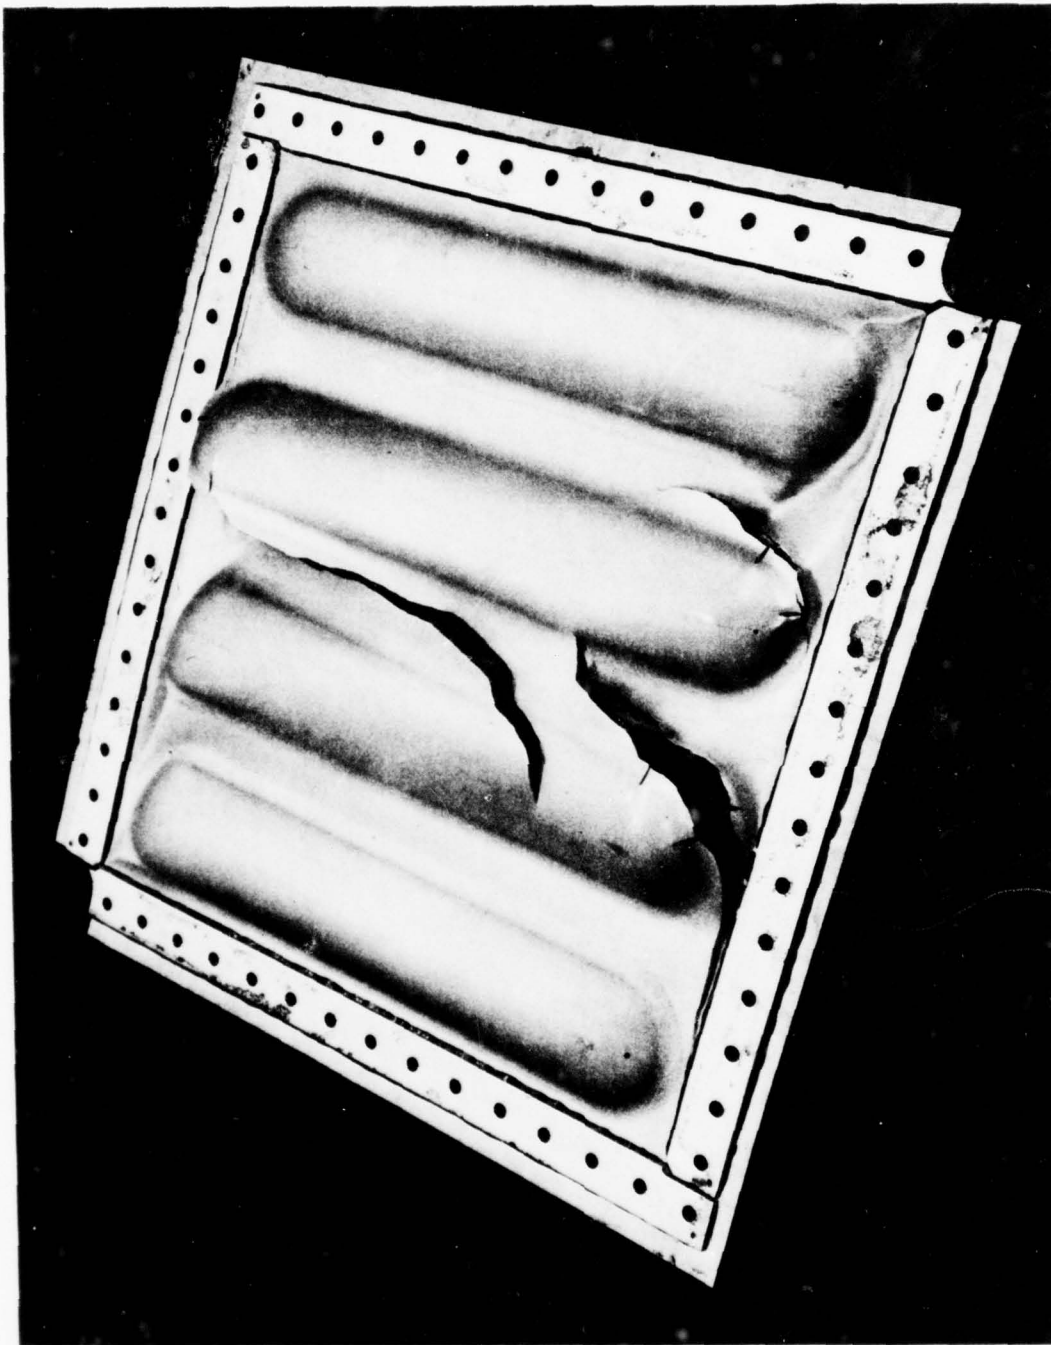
TYPICAL RESIDUAL STRENGTH TEST FAILURE FOR
